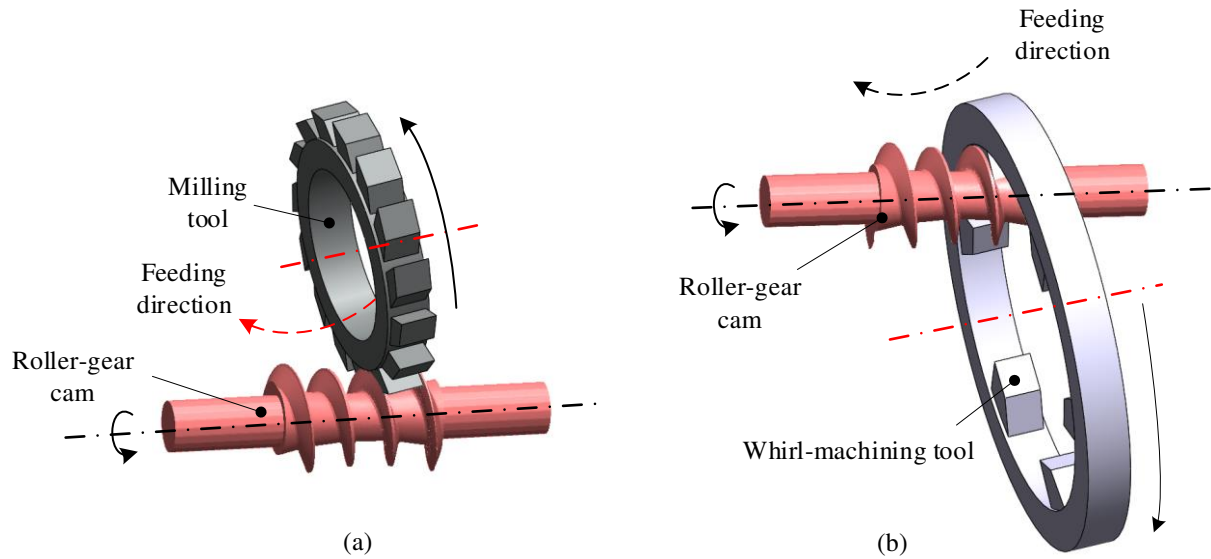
Comparison of the manufacturing process: (a) Milling; (b) Whirl-machining
